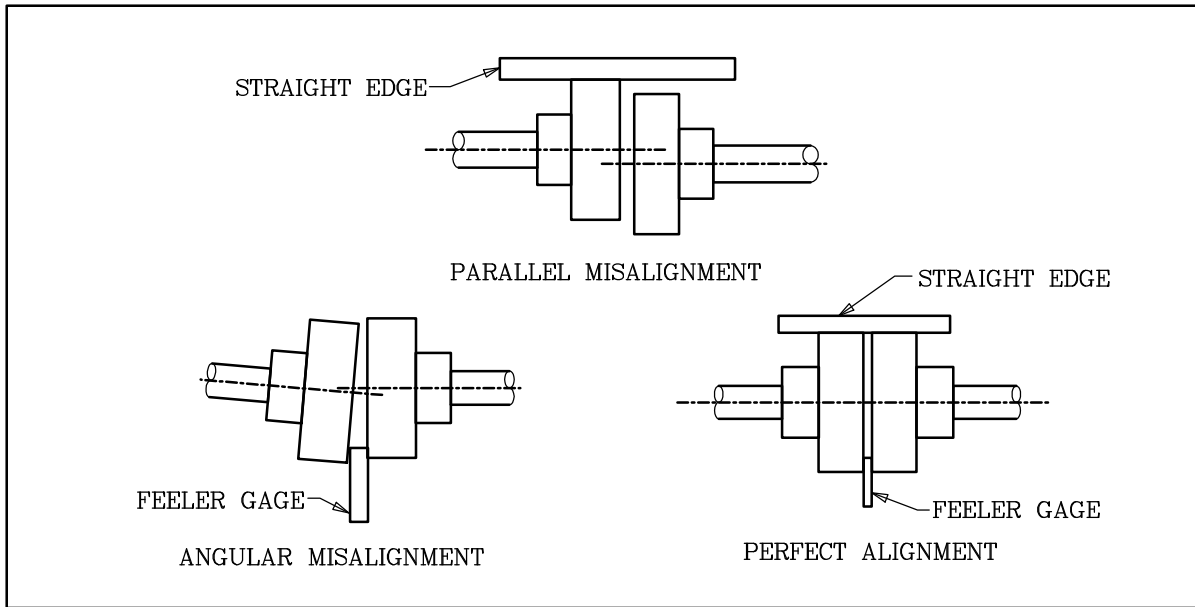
TESTING ALIGNMENT, STRAIGHTEDGE
